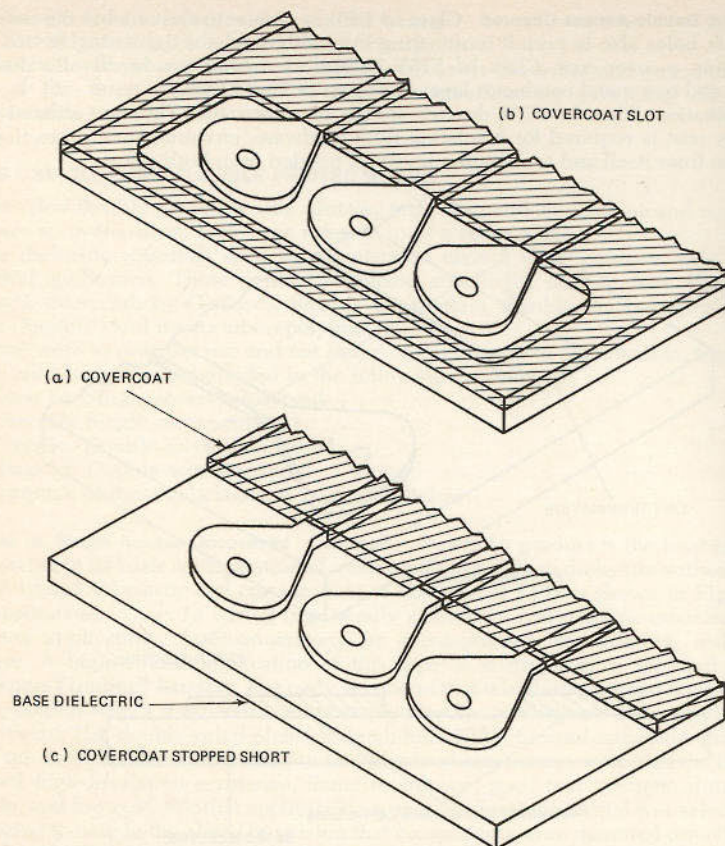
Class Ib single-access covered flexible printed wiring.
